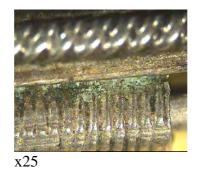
Silver bracelet left, optical microscope photographs, corrosion of the weld
